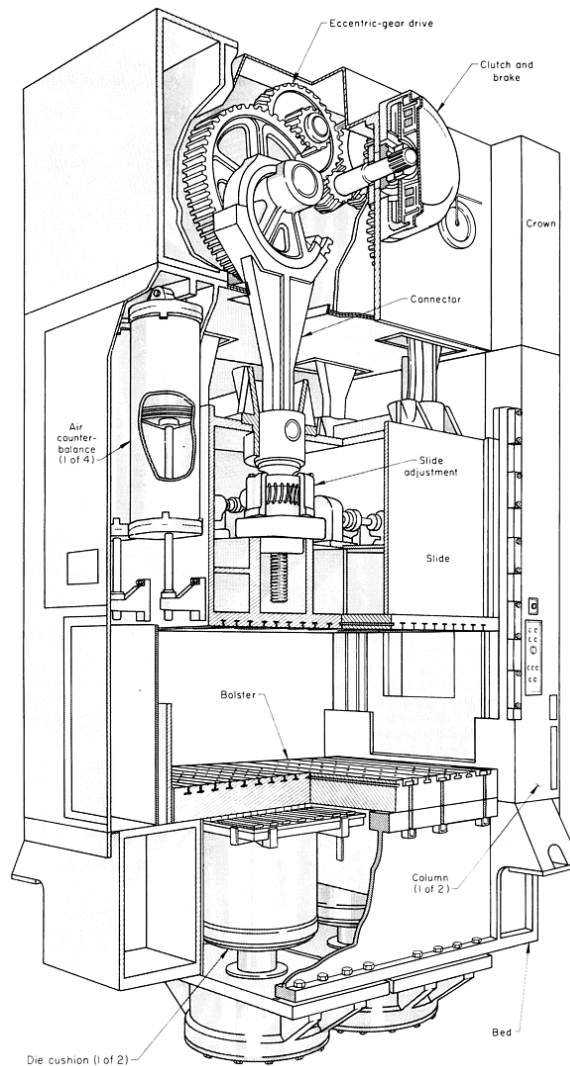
Principal components of a single-action straight-side mechanical press. The press shown has a large bed, four-point suspension, and an eccentric drive with counterbalance cylinders. Slide adjustment is motorized.
